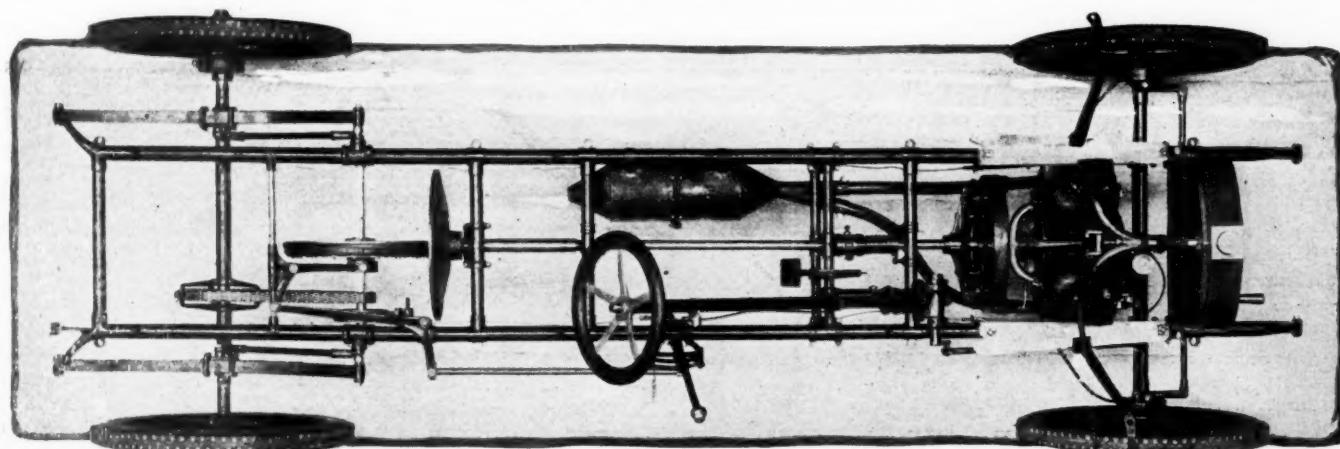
Plan view of chassis of Crescent cyclecar, showing tubular frame construction and friction transmission
